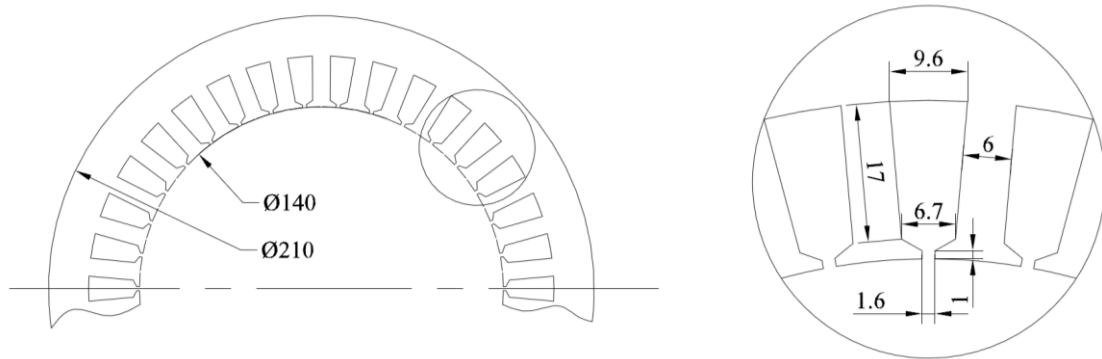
Stator iron design, iron sheet NO 20 (dimensions in mm)
